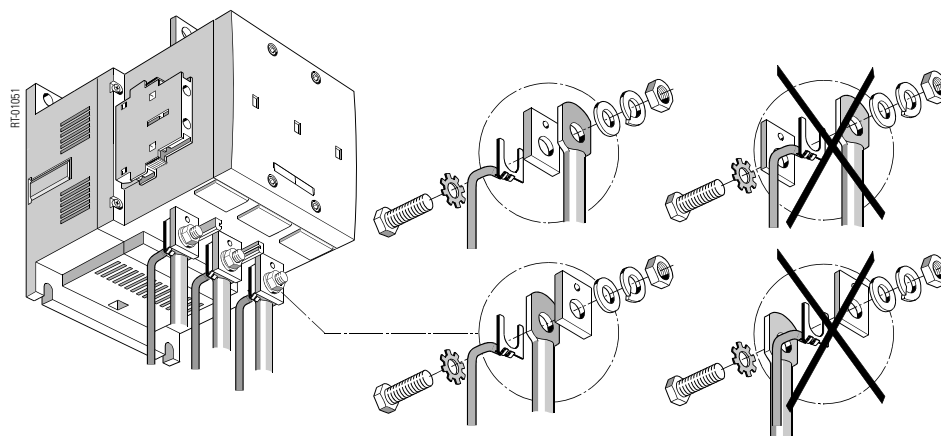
Cable connection of the main circuit surge suppressor module
